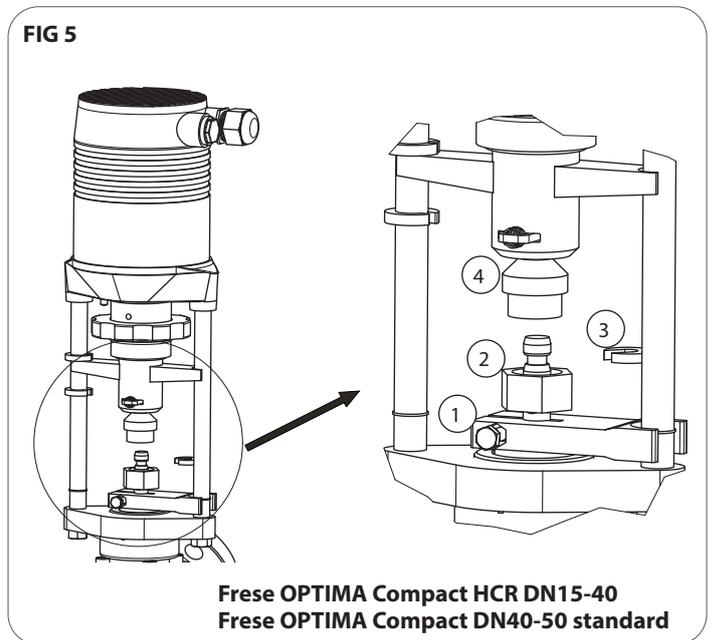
Spindle connection Frese OPTIMA Compact HCR DN15-DN40 and Frese OPTIMA Compact DN40-DN50 threaded versions:
